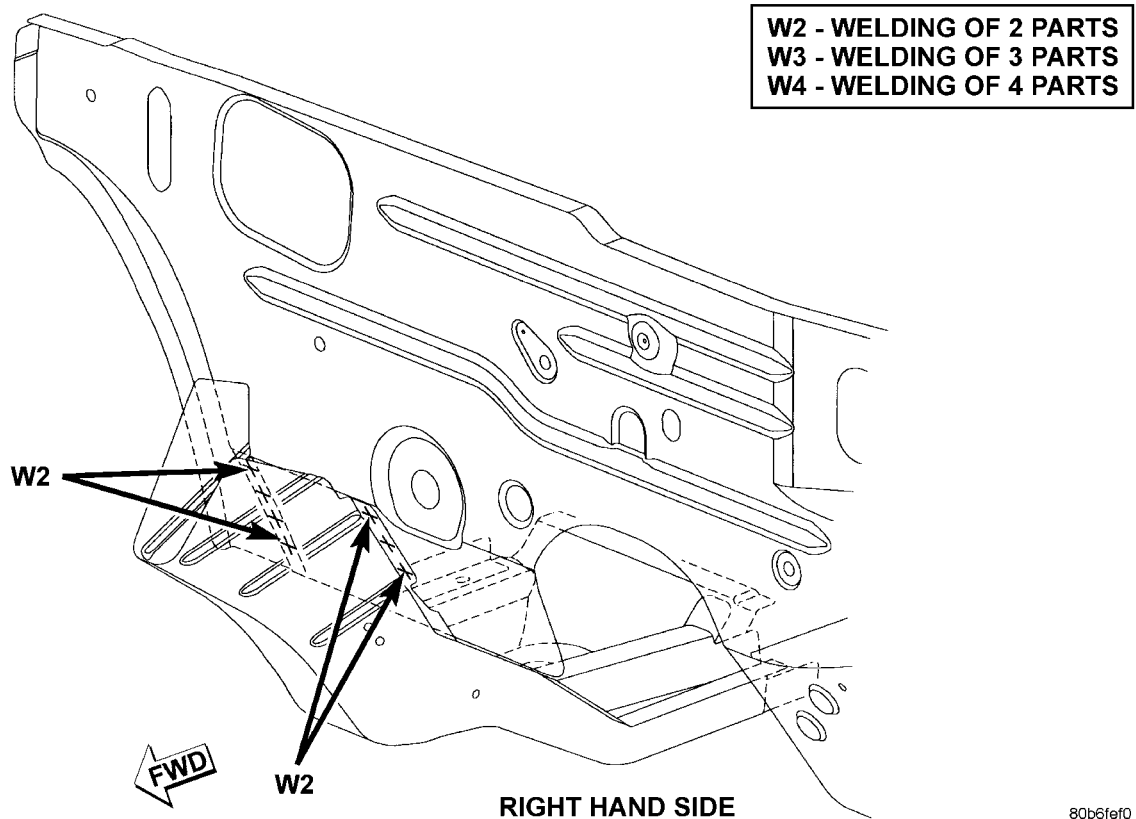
FRONT SIDE COWL AND FRONT RAIL ASSEMBLY TO RAIL EXTENSION
